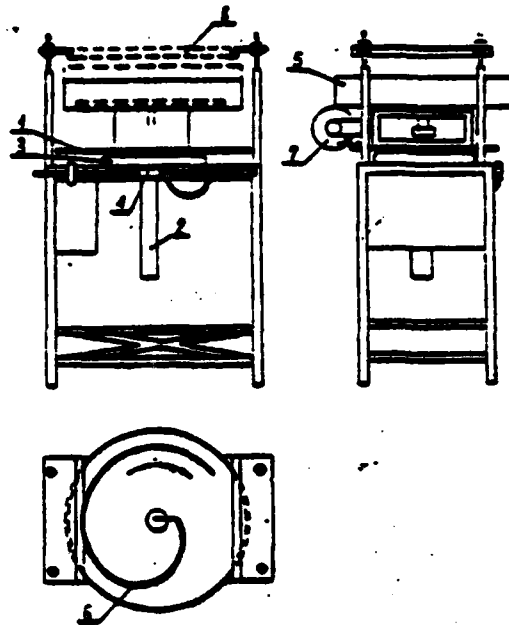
Arrangement for encapsulation by the method of dipping. 1 - moving plate; 2 - leader; 3 - pneumatic cushion; 4 - valve; 5 - container with resin; 6 - mixer of resin; 7 - reducer of revolutions; 8 - hold (clamp) for attaching the subassemblies.
